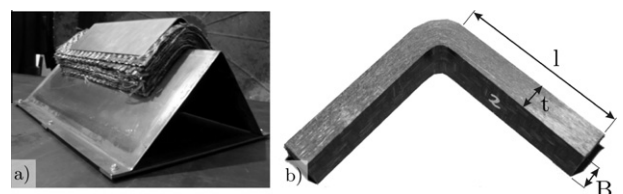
(a) Specimen manufacturing with 24 plies and a forming tool consisting of upper and lower part (prior to consolidation); (b) final specimen geometry.
